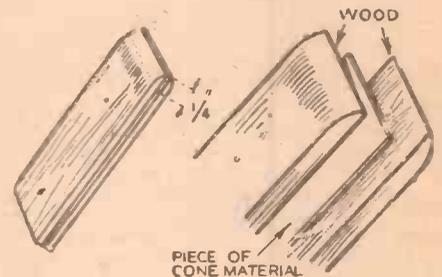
A novel tool for turning the cone edge for fixing purposes.
